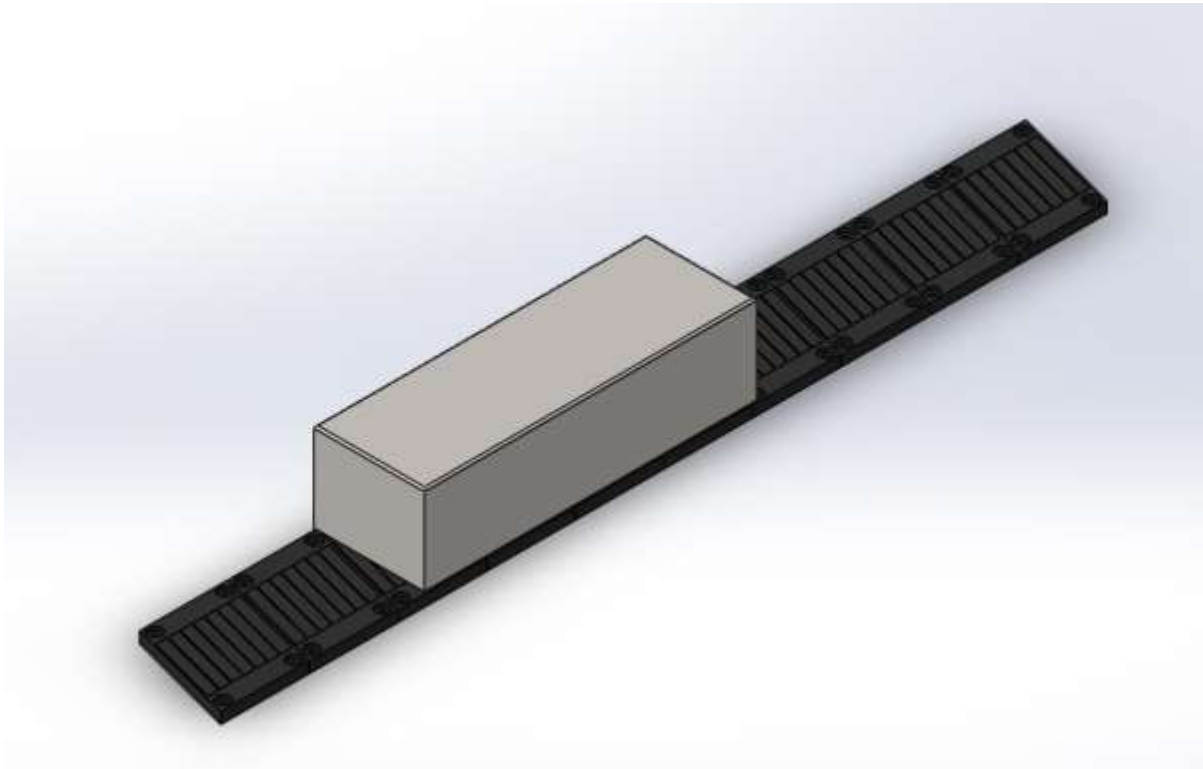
3 D Model of Linear Drive Mechanism for XY Axes
